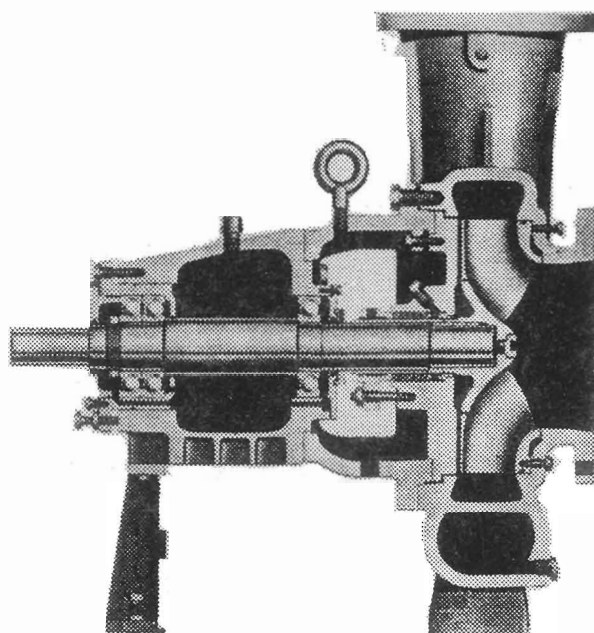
12 Paper - stock pump with open end-suction impeller. Back pull-out design permits disassembly without disturbing piping connections. (Goulds Pumps, Inc)
